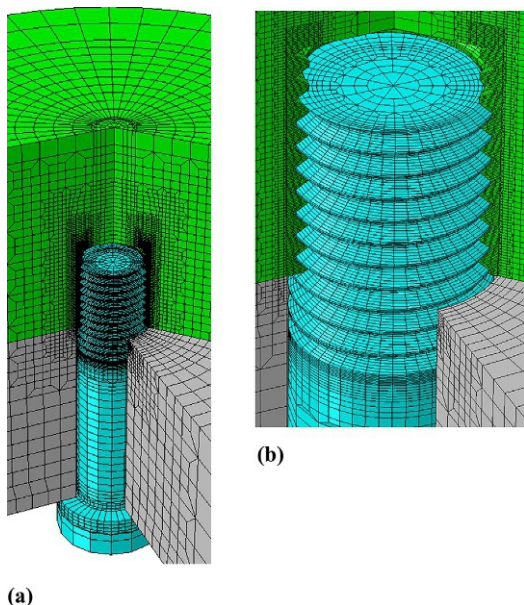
FE model of body-side engaged threads. (A) Entire model and (B) detail view of engaged thread portion.
